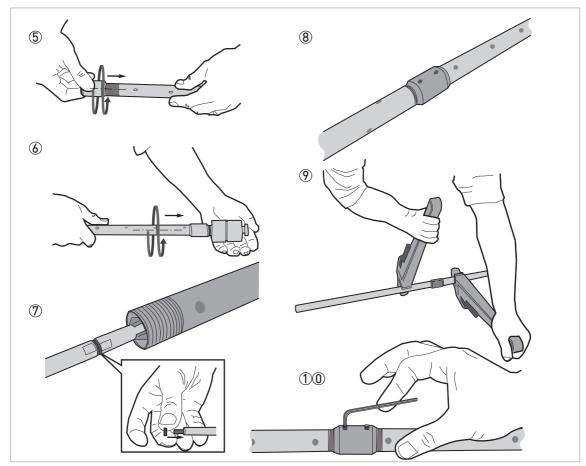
How to assemble the segmented coaxial probe: part 2
